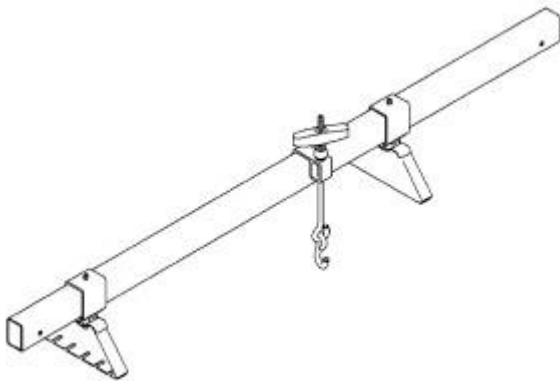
SUPPORT FIXTURE, ENGINE - 8534B
